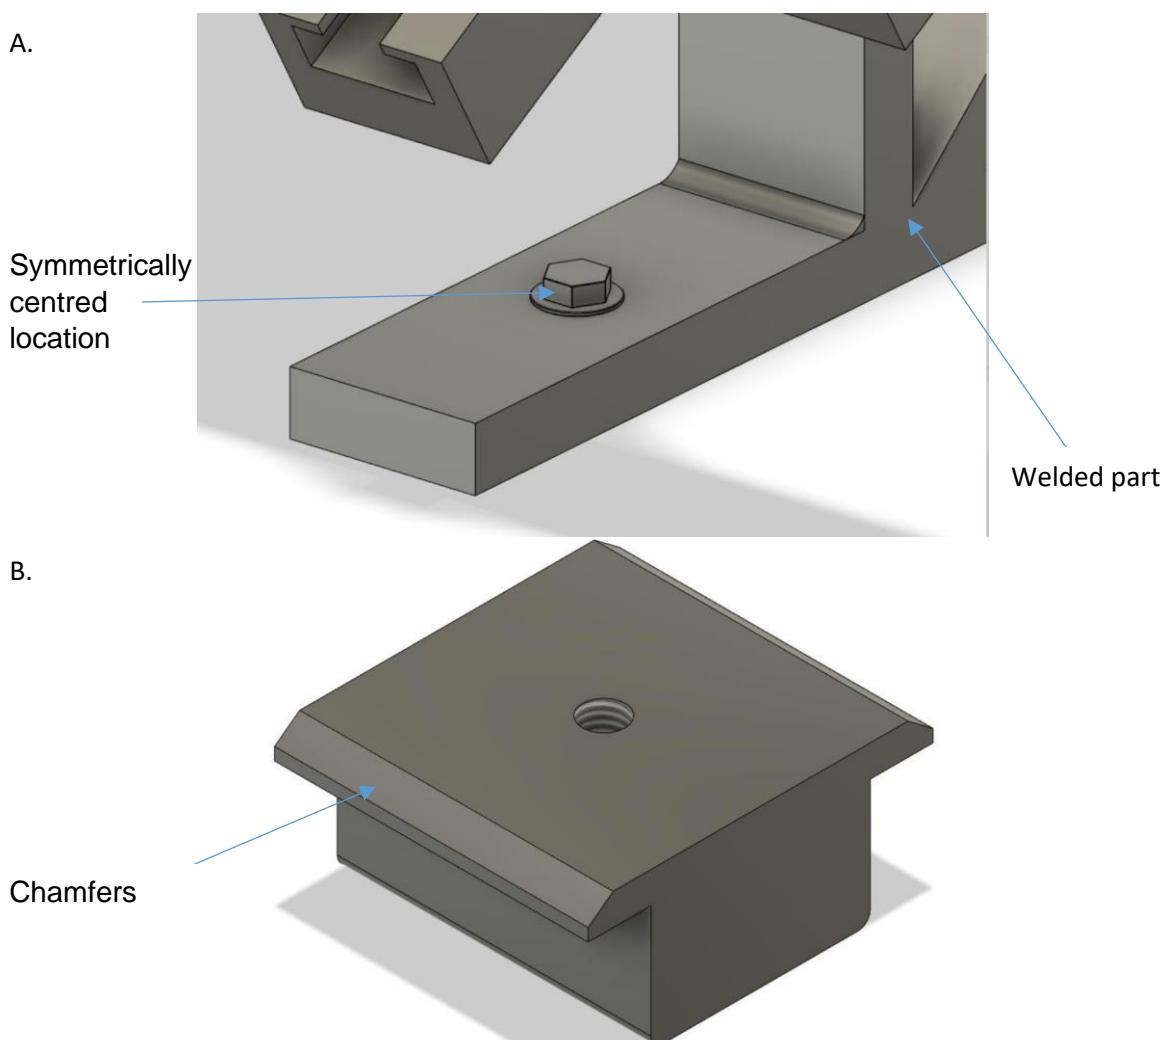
A: location of drilled hole; B: middle clamp chamfers
